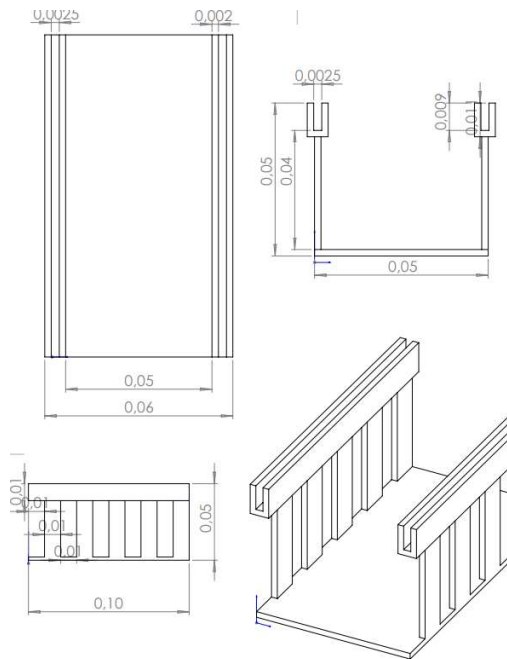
Drawing of the lower part of the fabric of the magnetic pillow
